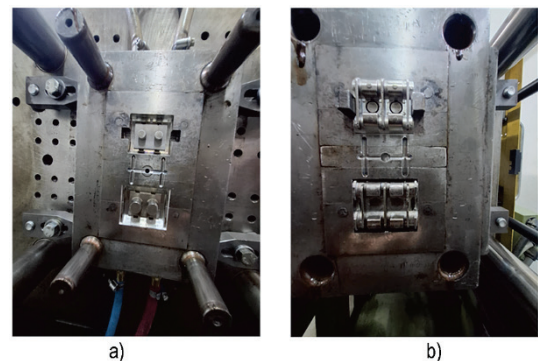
Mould for branching terminal block: a) fixed side, b) movable side [6]
